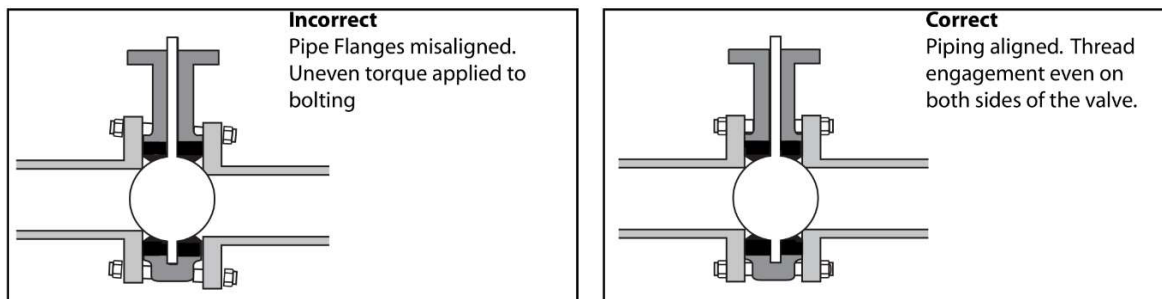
FINAL VALVE ALIGNMENT AND TIGHTENING OF FLANGE BOLTS
